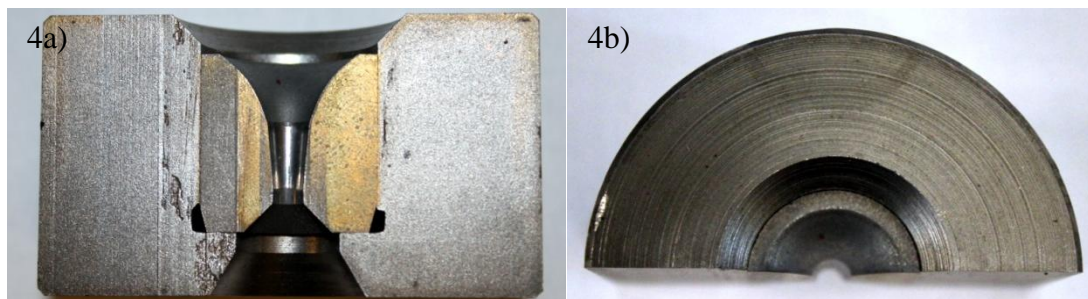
Cut Wire Die Cross Section (4a) and Top View (4b)
